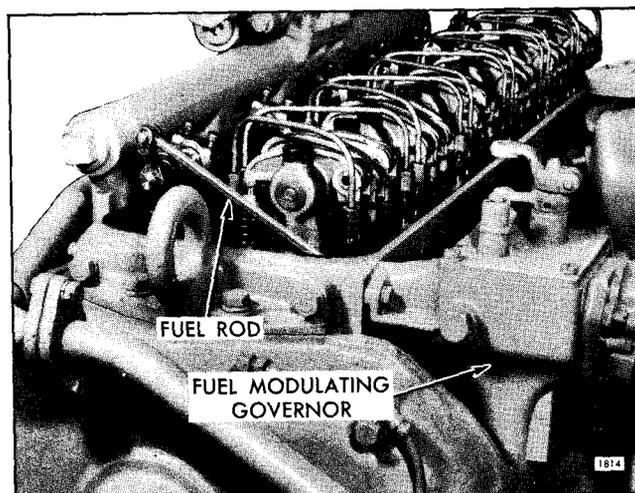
Standard Fuel Rod Used with Fuel Modulating Governor
